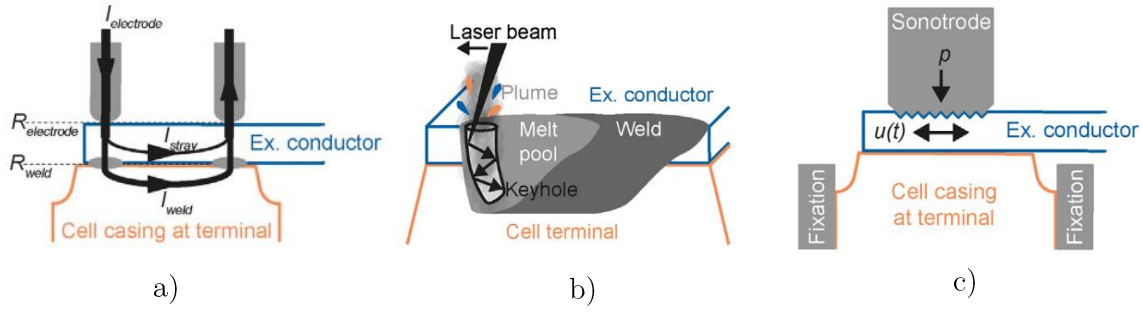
Resistance, laser and ultrasonic welding of cell terminal. Adapted from [32]. a) Resistance welding of a battery cell with parallel electrodes. b) Keyhole laser welding of a cell terminal. c) Ultrasonic welding of a battery cell through ultrasonic vibration.
